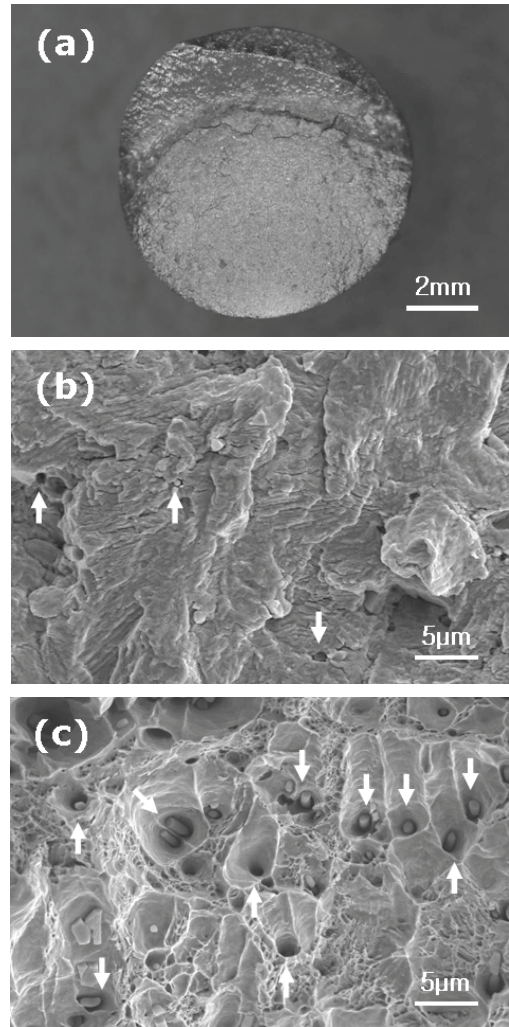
Fractograph of 850°C-20% fatigue specimen. (a) crack initiation on the surface, (b) striations near the final fracture, (c) dispersion of inclusions on the fractured surface
